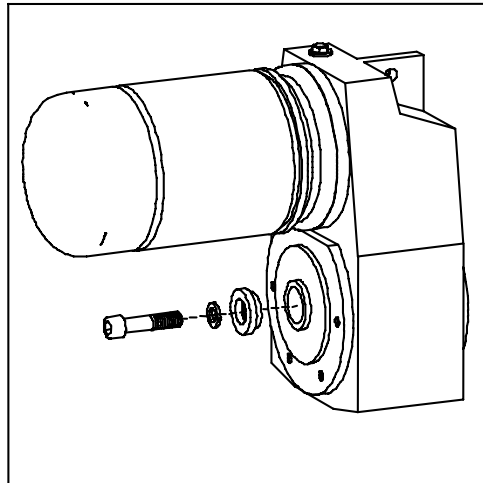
Remove the Locking Bolt, Spring Washer and Stepped Spacer
